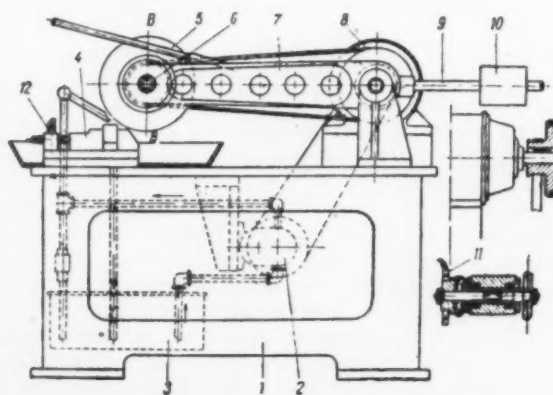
DIAGRAM OF ELECTROEROSION CUTTING MACHINE
